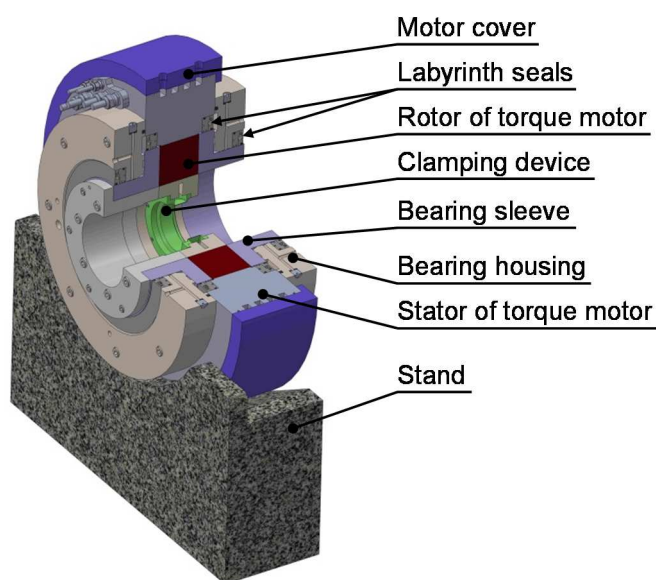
Spindle unit for two-sided ultra-precision machining with direct drive and clamping device
